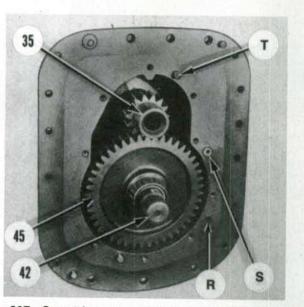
Secondary countershaft, output shaft and gear are removed from rear of transmission.
